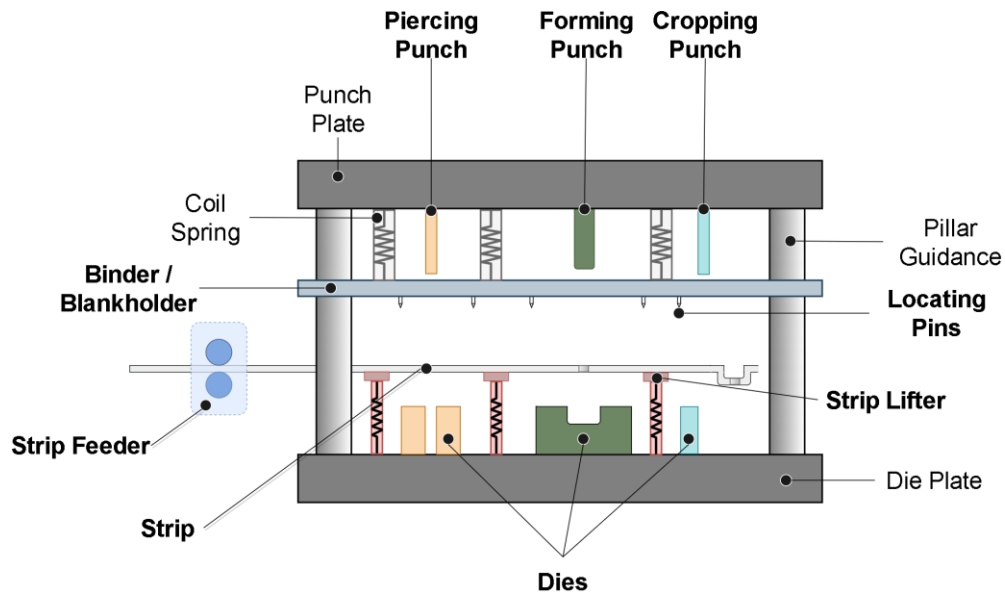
Progressive die tooling with primary components indicated with bold text; Binder, Strip, Die, Punch, Lifters, Locating Pins and Strip Feeder.
